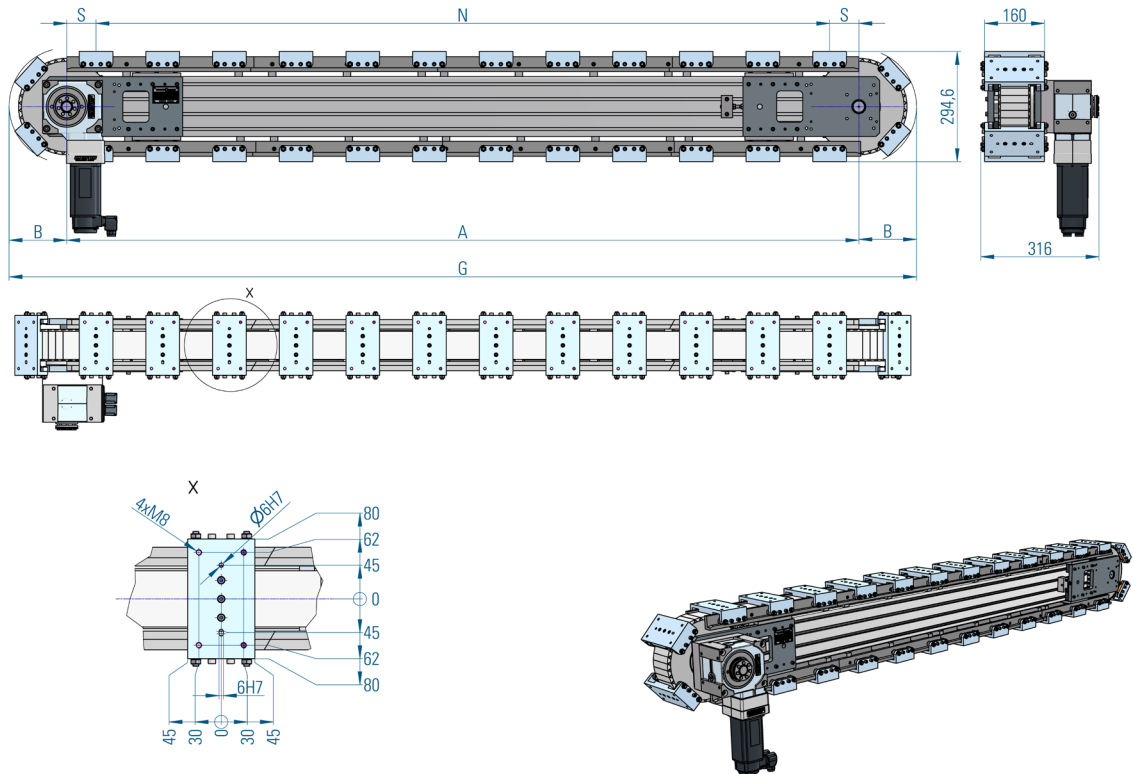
Dimensional drawing, main dimensions of the linear transfer system
